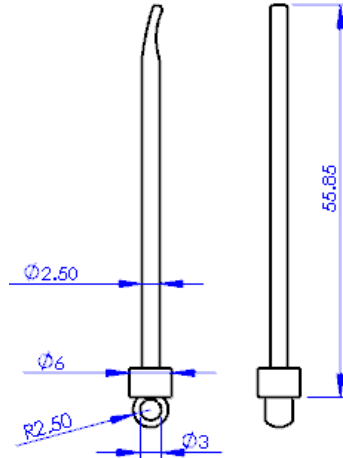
Diagram and dimensions of the Dr. Dabber Loading Tool. All dimensions are in mm.
